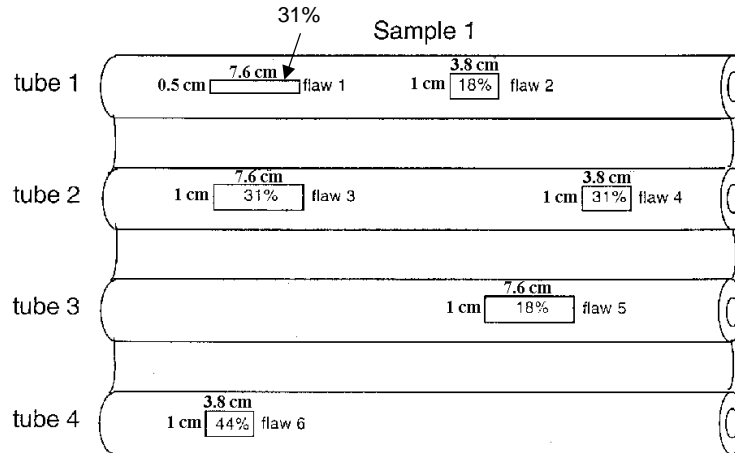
Boiler water-wall tube specimen #1 with machined defect pattern.
